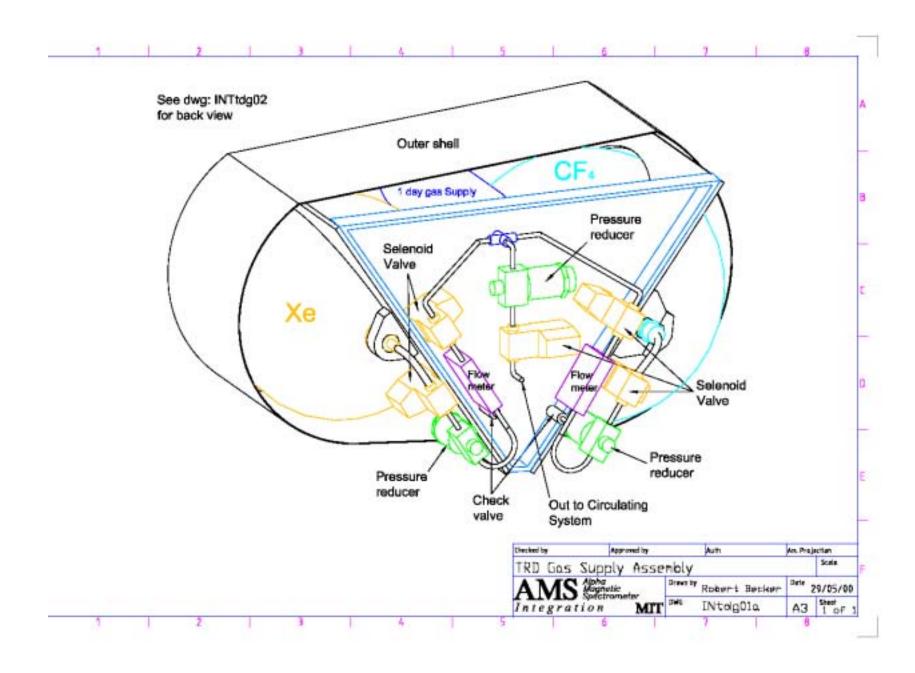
TRD Gas Supply Assembly (Front View)
